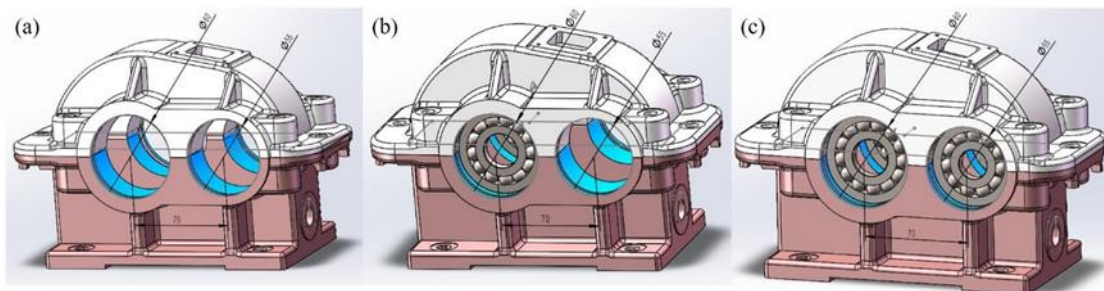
(a) Parametric assemblies with two parts; (b) parametric assemblies with three parts; (c) parametric assemblies with four parts.
